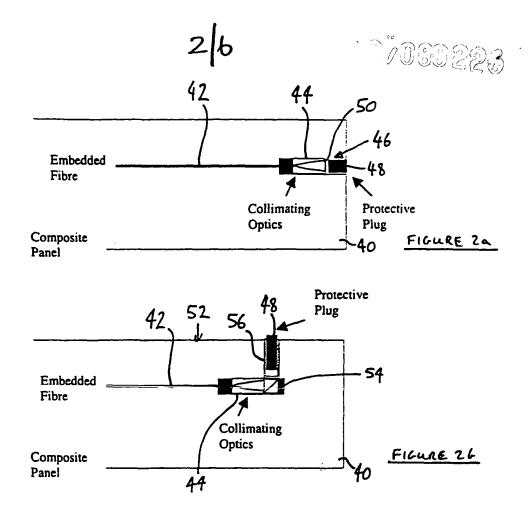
Schematic concepts for edge and surface embedded optical ports to embedded fibres. Protective plugs could protect the ports during composite manufacture.
